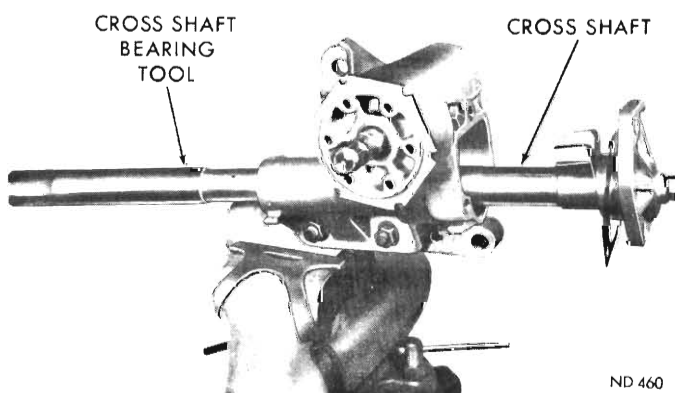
Removing or installing sector shaft and cover assembly (typical) (Tool E19C20)
